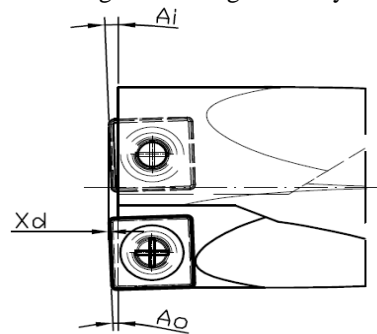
Top View of 'U' Drill Body with Carbide Insert Mounted on it.
